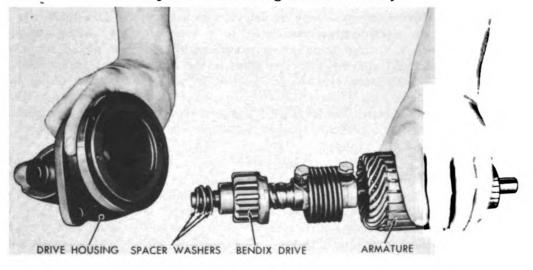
Installing Armature Shaft and Bending Assembly into Drive Housing. Digitized by GOOSIC Page 238UNIVERSITY OF CALIFORNIA
